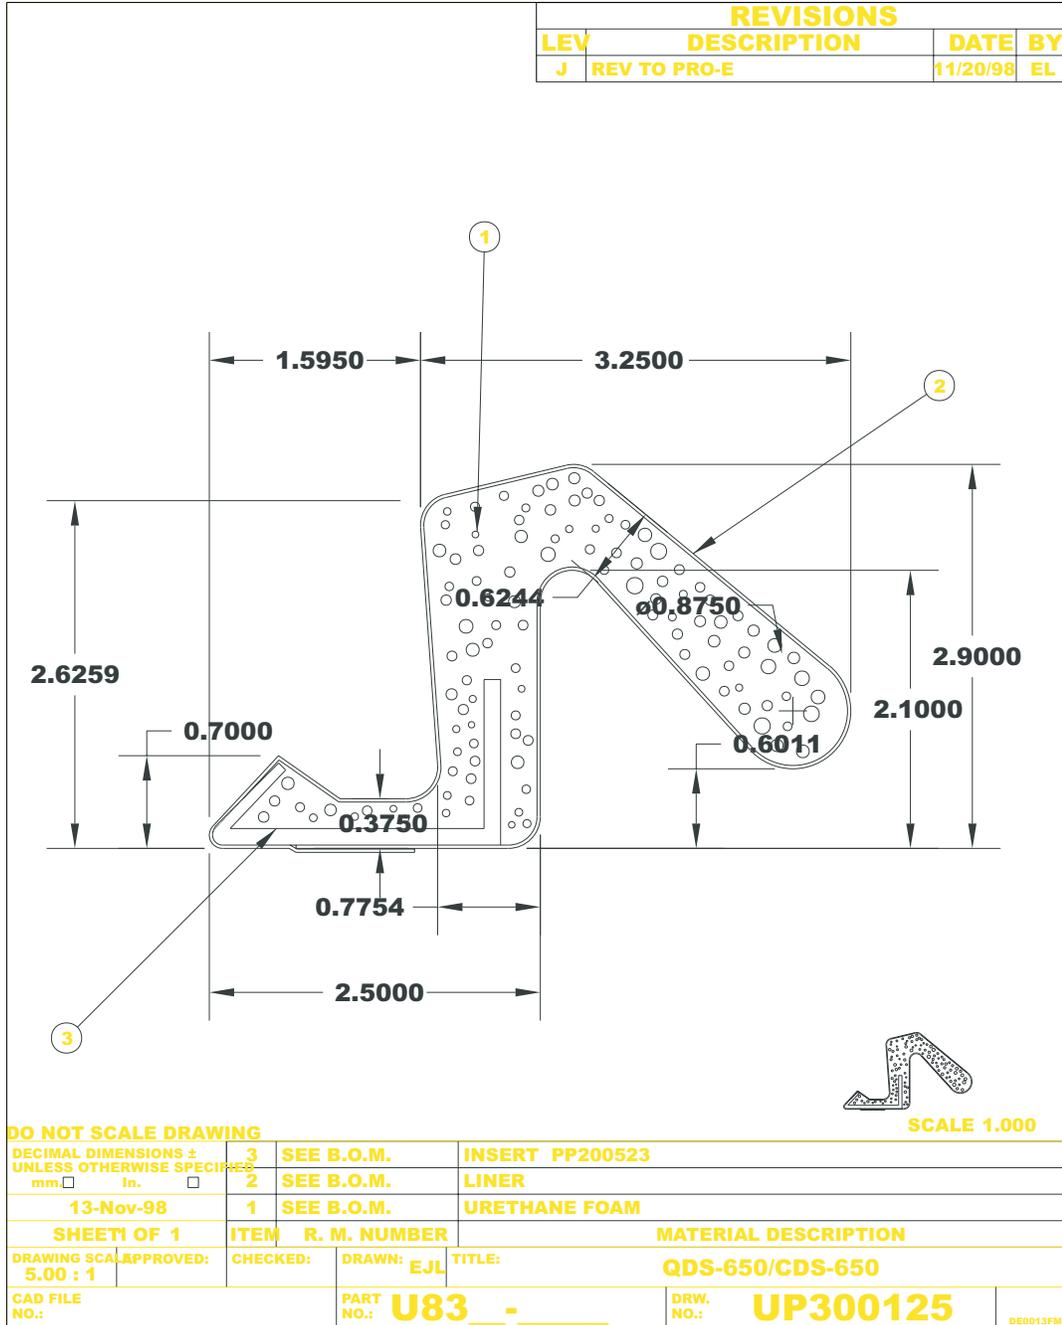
6-Panel Weather Strip.dwg (\* PATENTED DRAWING)
